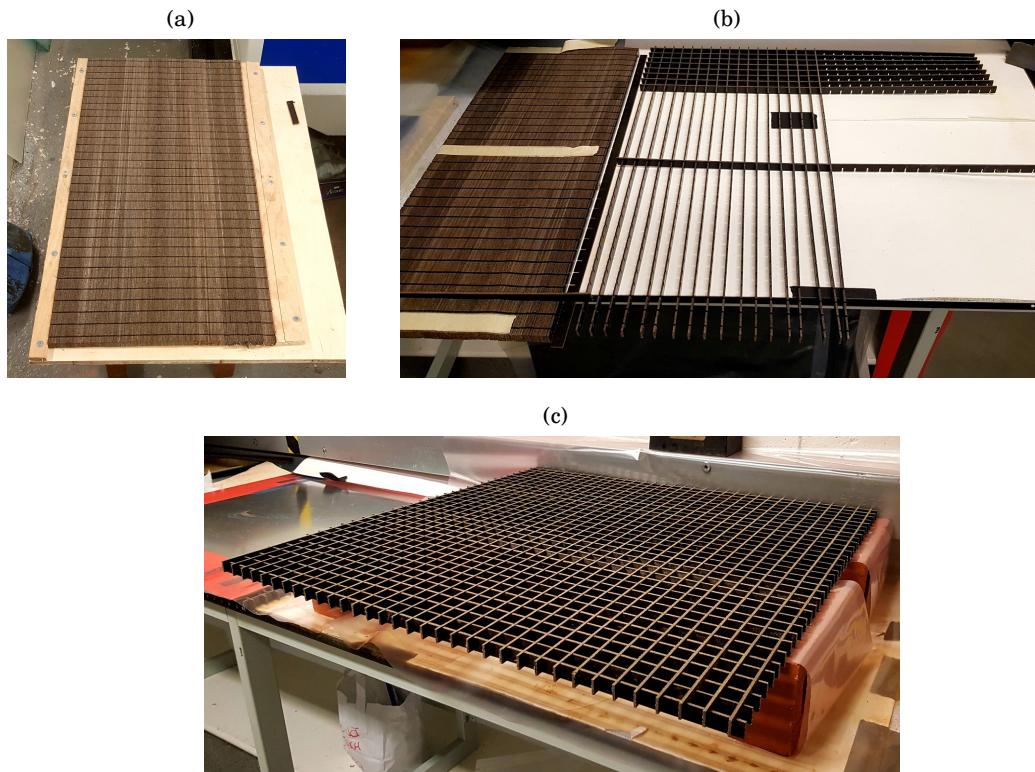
Large-scale sandwich panels core strips interlocking: (a) core strips before interlocking; (b) core assembly process; (c) assembled core (bare configuration).
